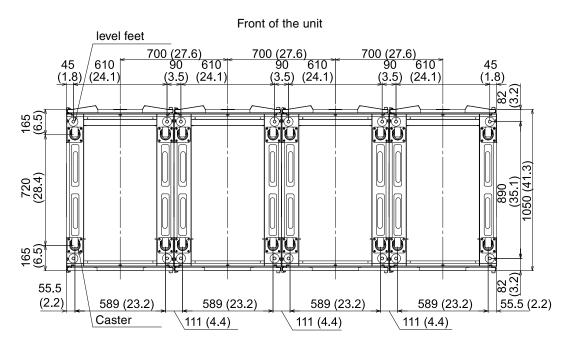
Floor Plan of Interconnected Equipment Racks Model 1740
